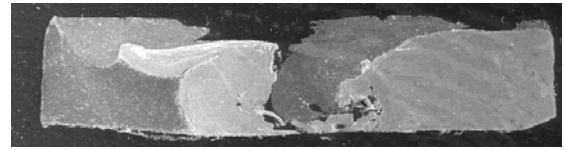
(c): Macrograph of weld produced at 1200 rpm and 300 mm/min
